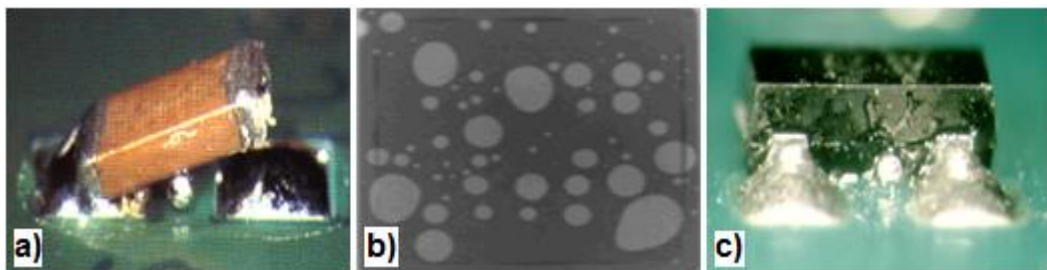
Some SMD soldering defects: a) Tombstone; b) Voiding; c) Solder Balls [adapted from [adapted from [51]].
